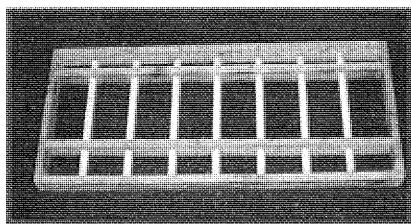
Place the inside pieces with the PVC inside the frame. Slide the inside 1 x 3s against the frame and screw together.
